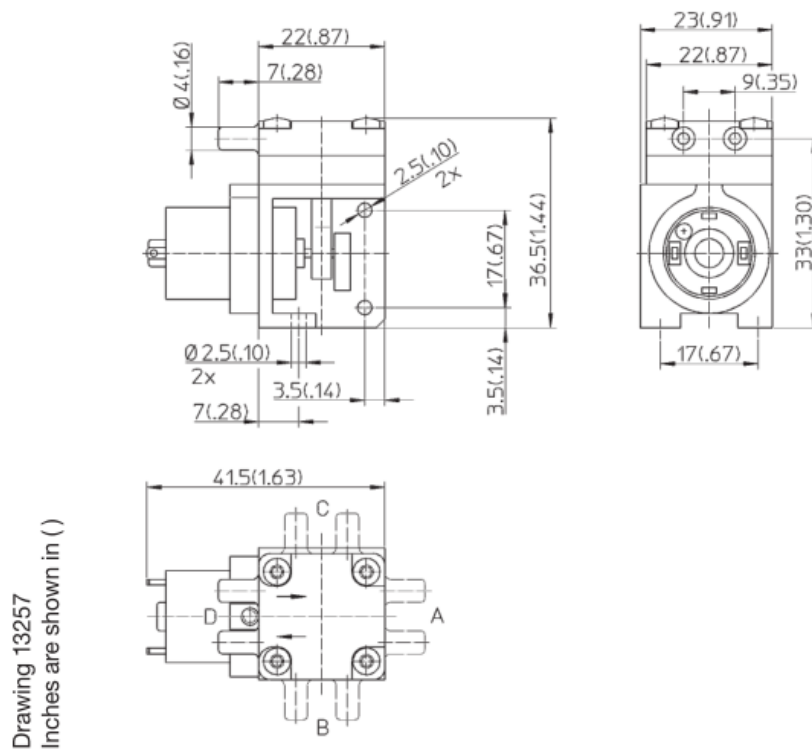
Multiview Schematic Drawing of 3003VDLC Diaphragm Pump
